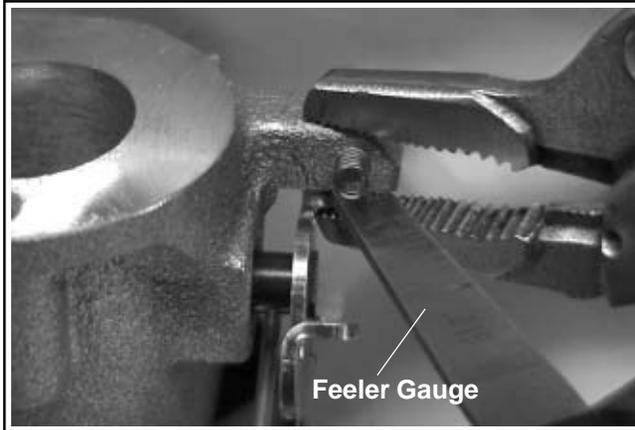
B-39. Inserting Feeler Gauge (Engines Without Stop Screw).
